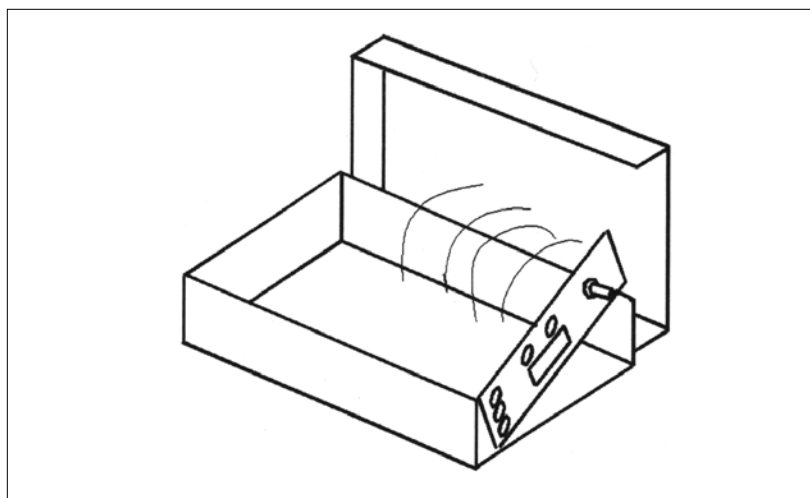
Front panel removed from its mounting guides. Rest it at an angle so that the rotary switch is easy to access.
